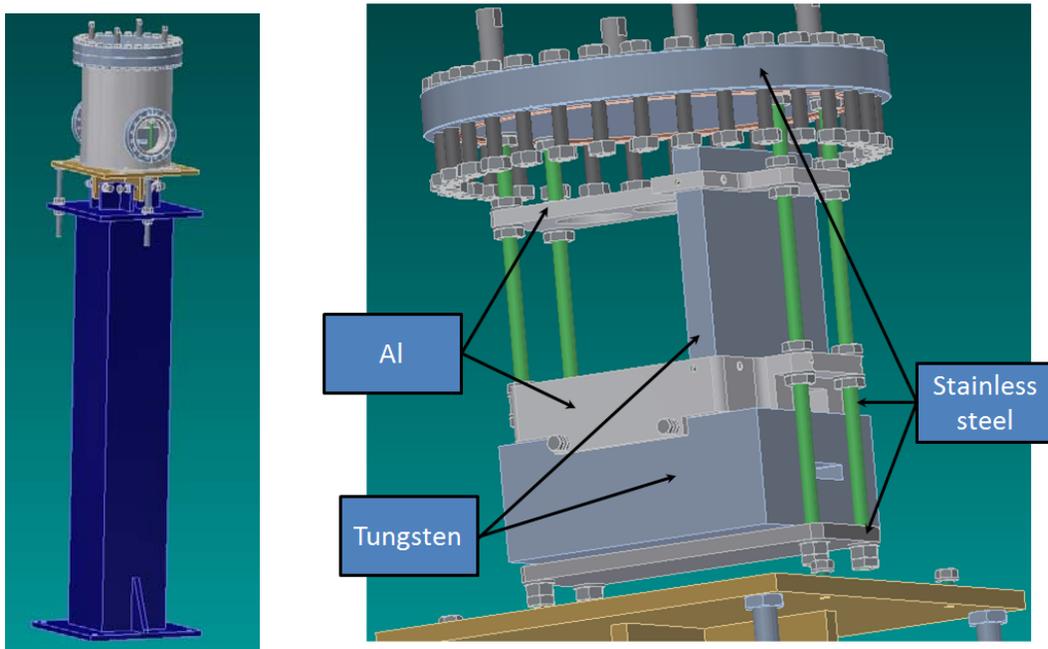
BRC2 (a) external view with support stand and (b) showing internal components
